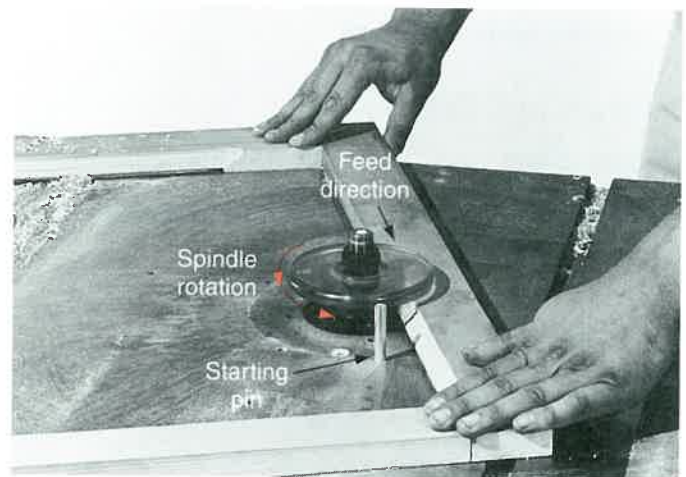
Narrow workpieces are held in a sliding table. A backer board reduces tear out. (Chuck Davis Cabinets)
